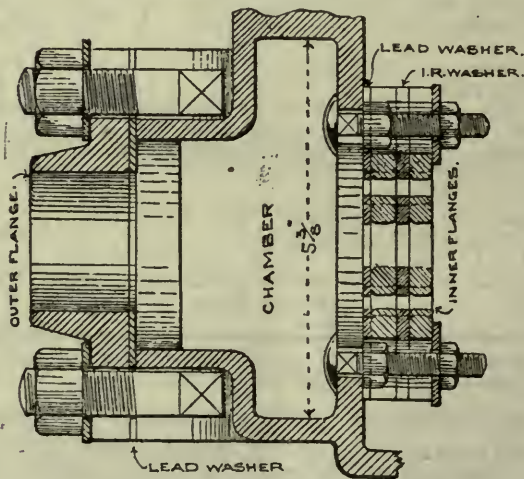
Sealing Chamber and Flanges for B 9 Mark I Cable.
